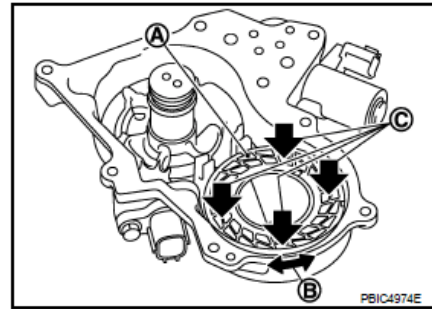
Checking Joint Between Dowel Pins And Dowel Pin Holes
